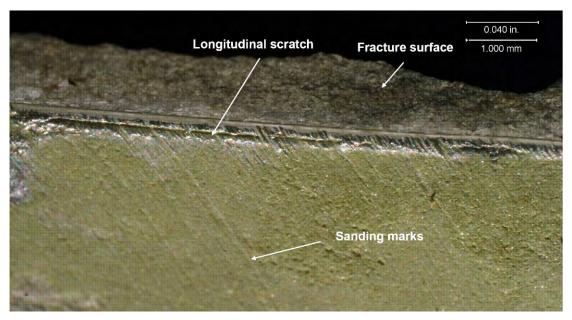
Fatigue crack originated from the scratch near hole 20
